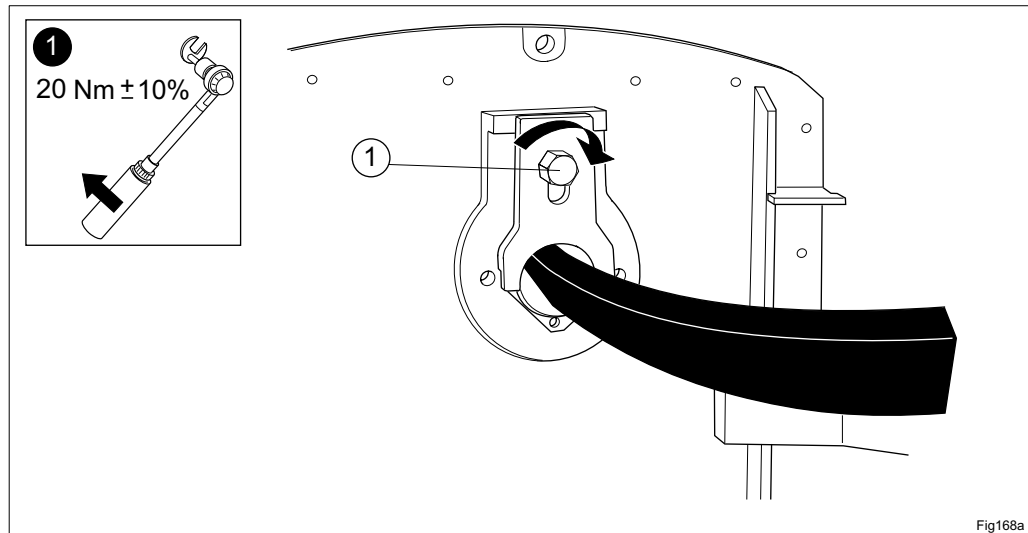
Fitting the flexible waveguide to MINI-LINK 7-E and 8-E.
